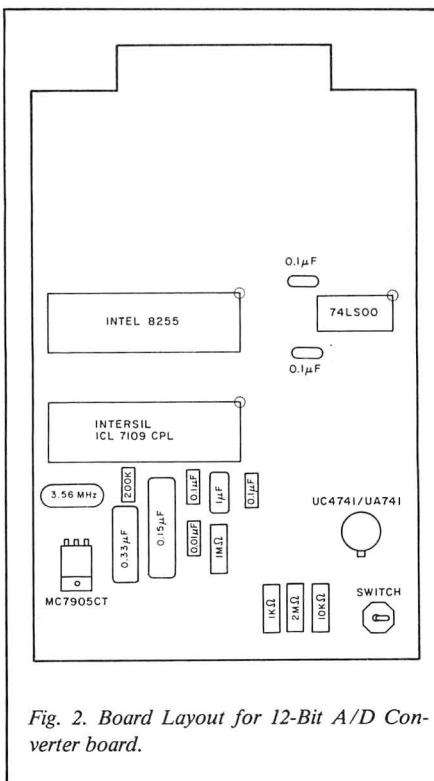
Board Layout for 12-Bit A/D Converter board.
